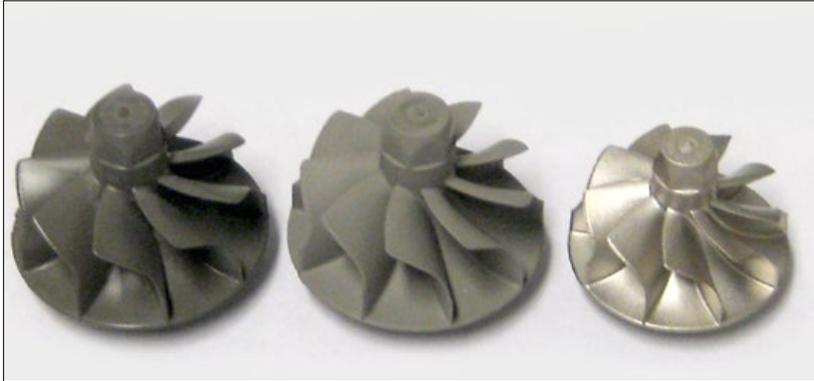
Green (left), brown (middle) and sintered (right) turbocharger wheel made of IN713LC (Courtesy Schunk Sintermetalltechnik GmbH)
